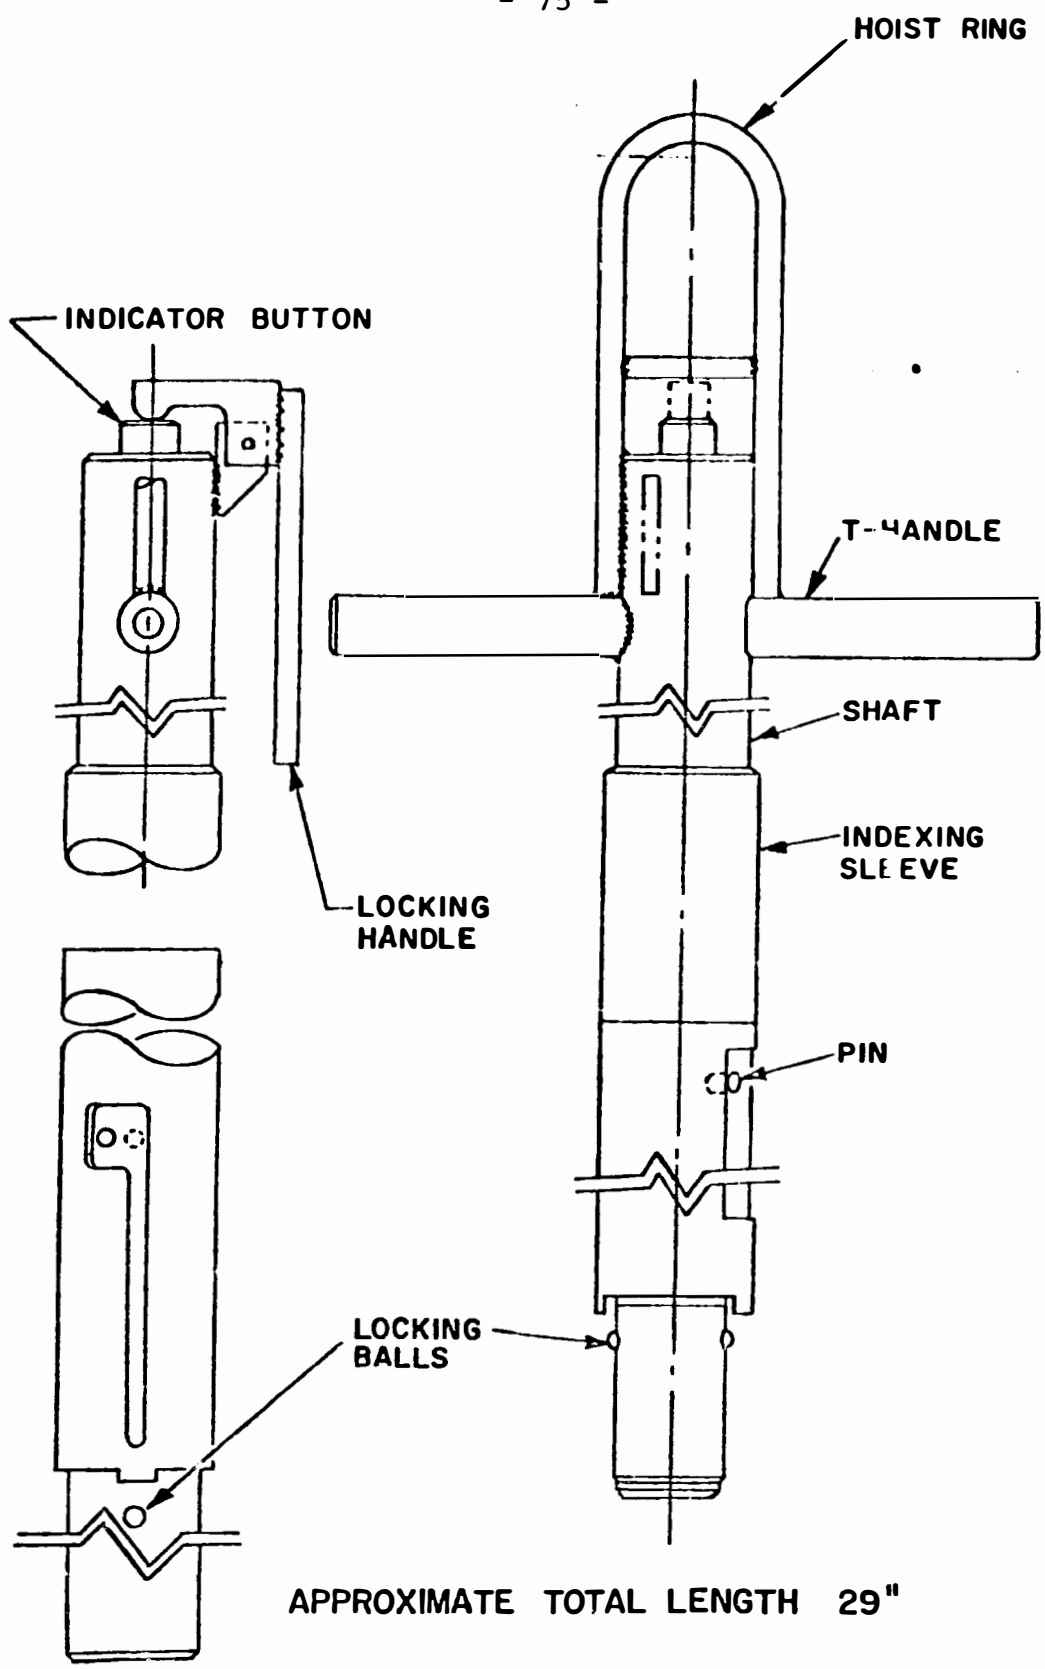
O-RING REMOVAL TOOL, 709007-1049
